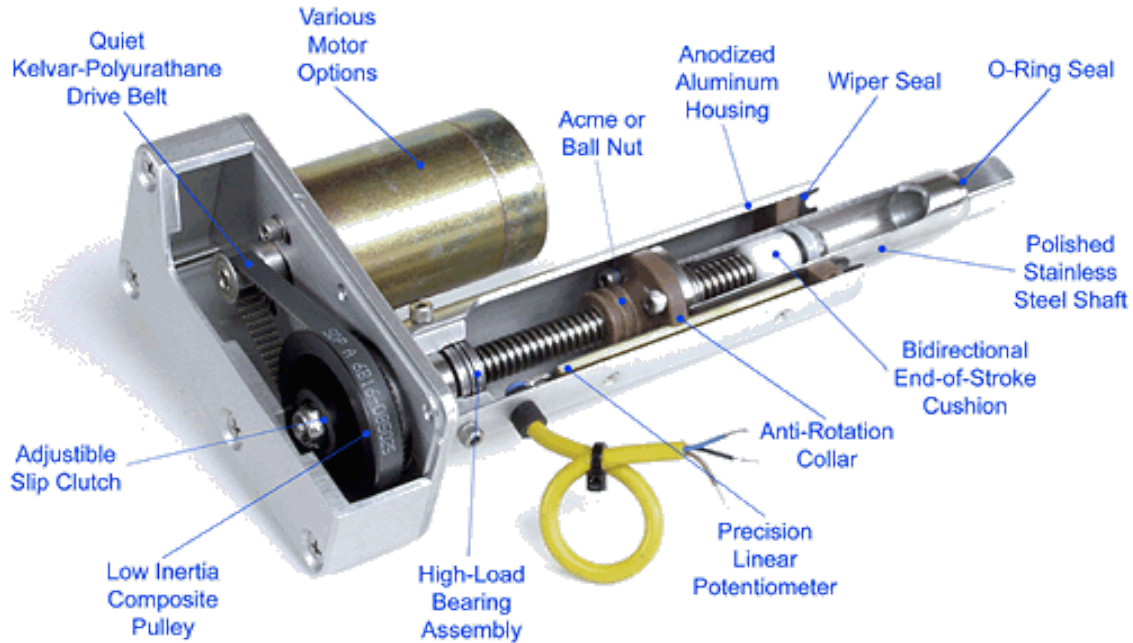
Cutaway picture of Ultramotion Bug actuator showing internal parts [19]
